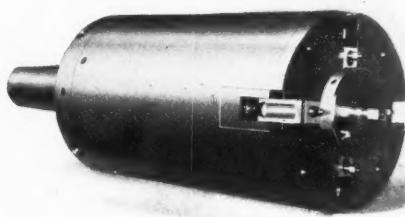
End of Rifling Head, showing Adjustment for Depth of Cut.
